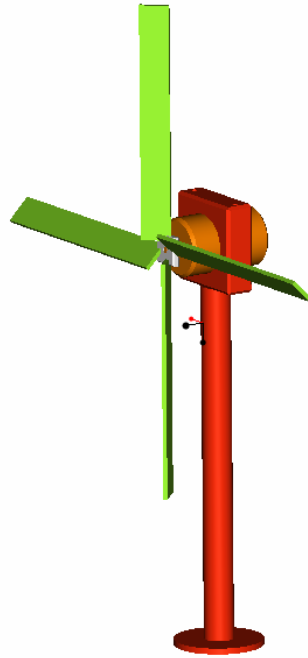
A Pro E generated concept for a horizontal axis wind turbine using a DC motor and blade assembly.
